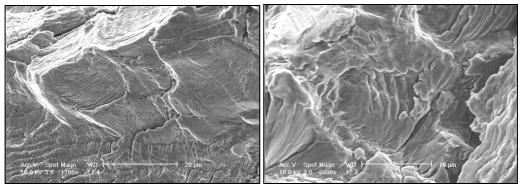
Fractographs of the fracture surface, showing typical striated regions
